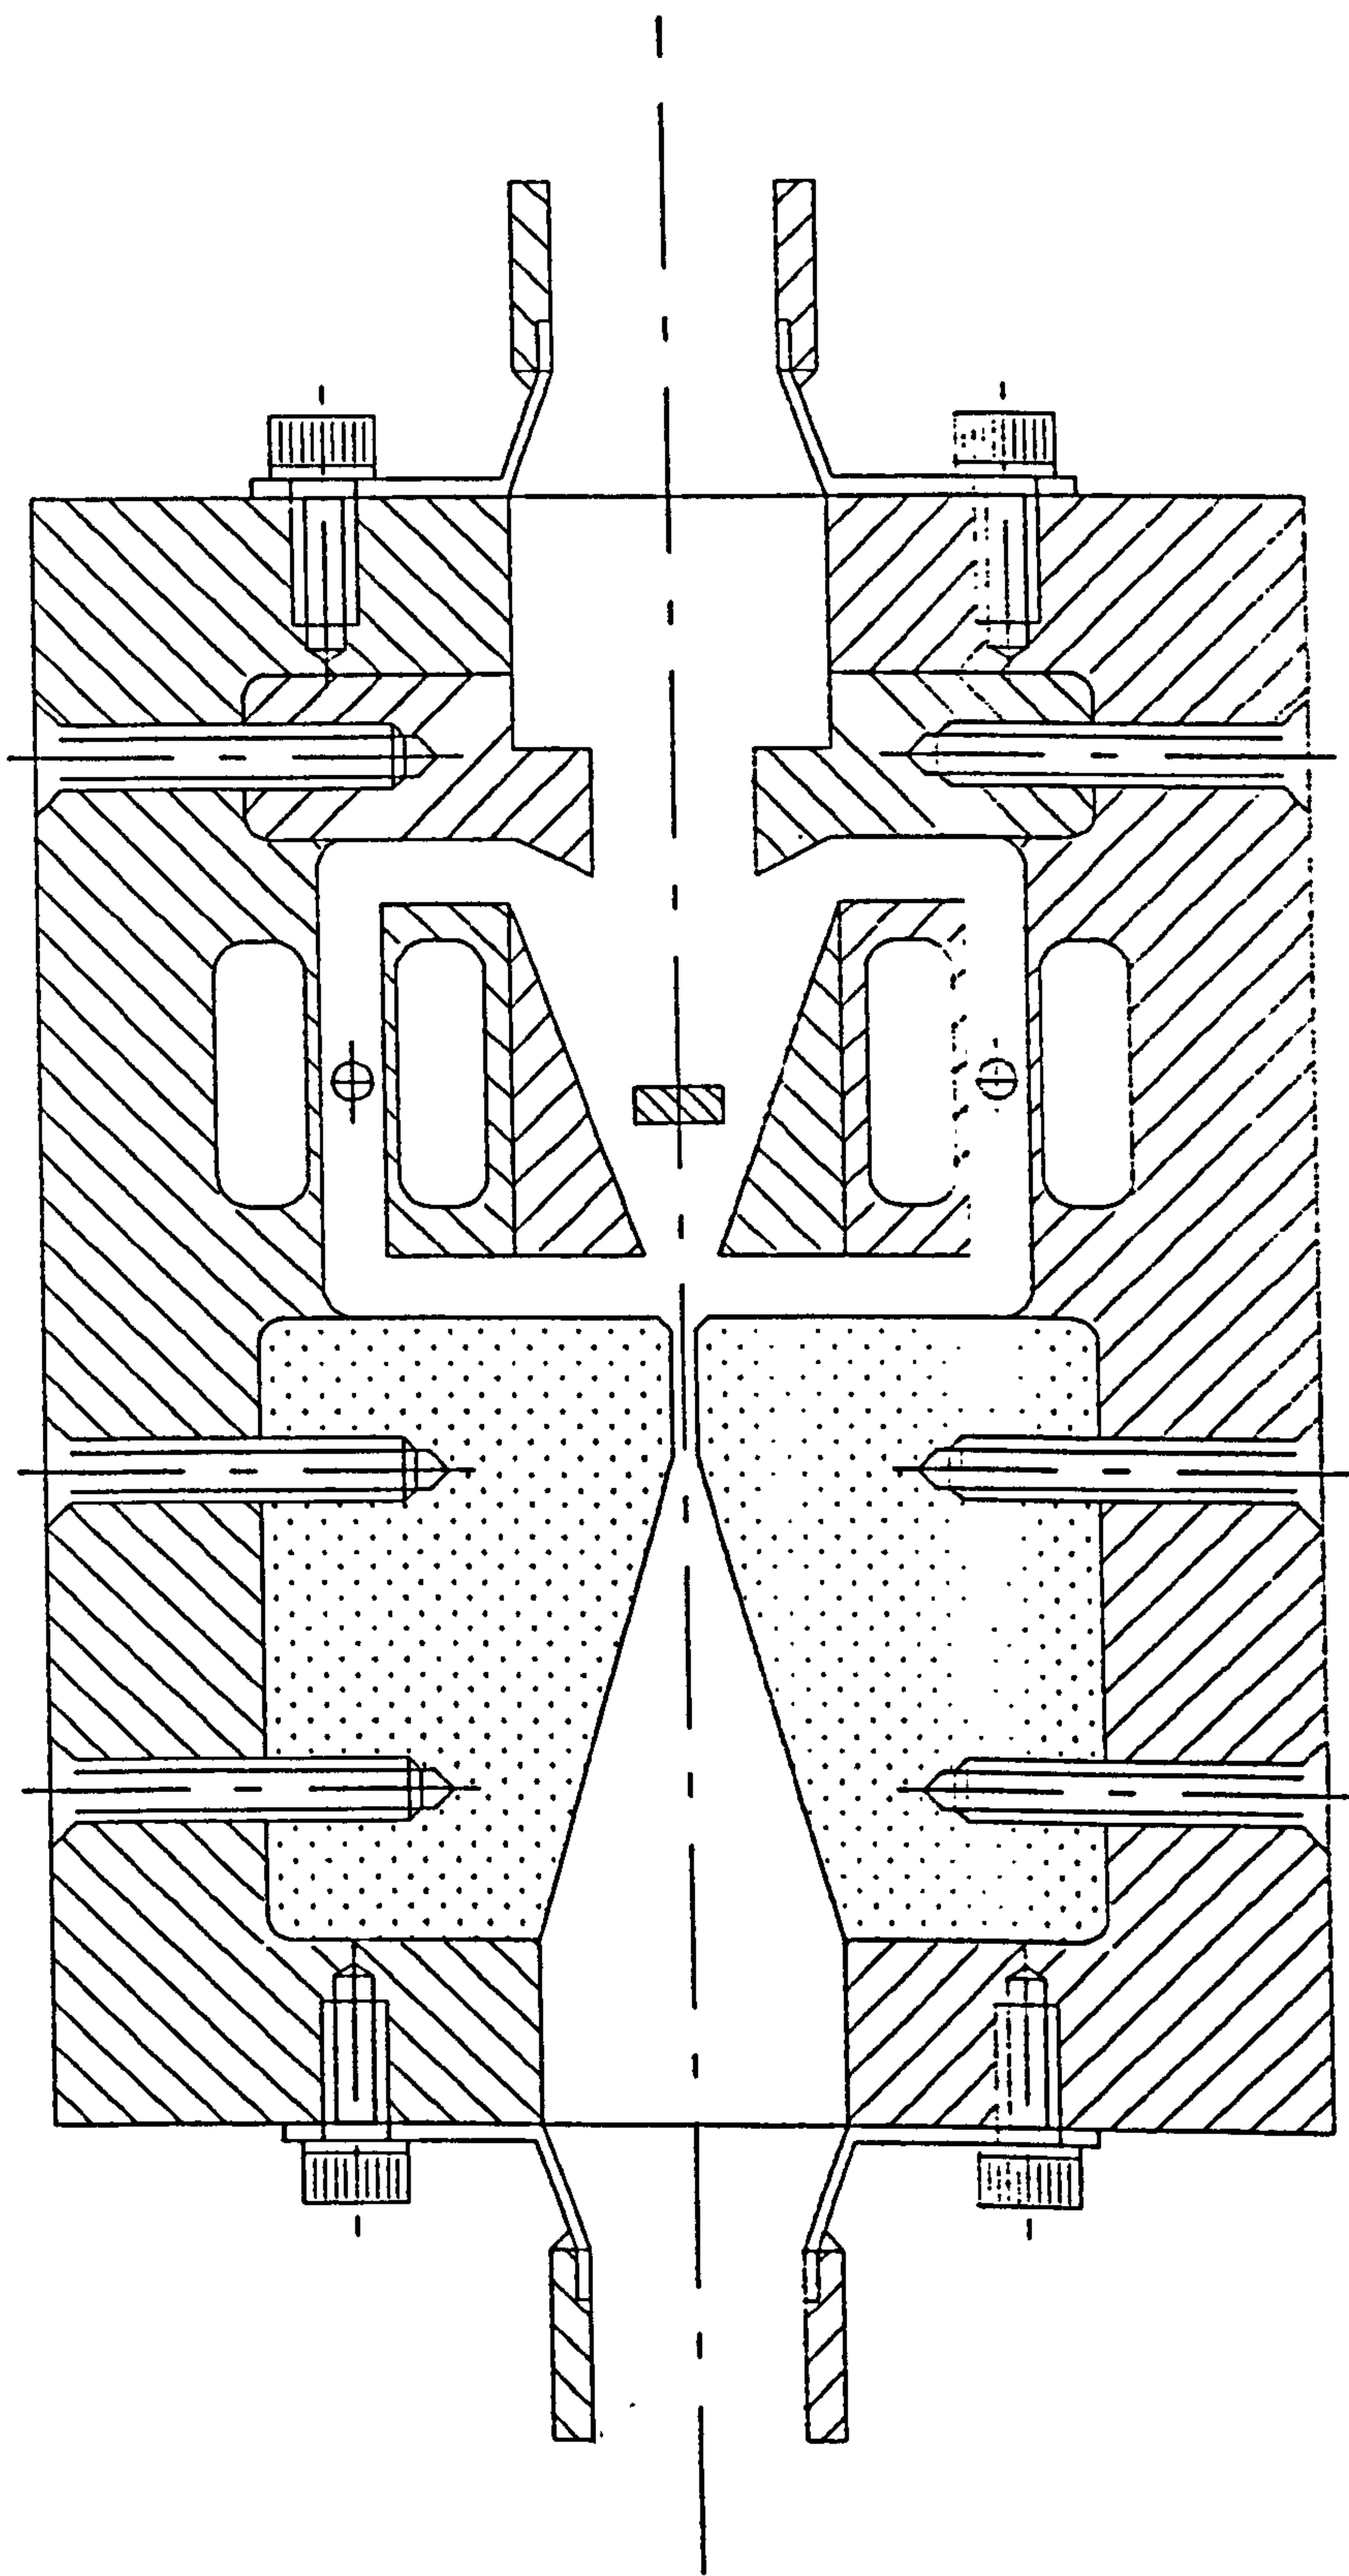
Geometry of Nozzle With Chamfered Outlet.
